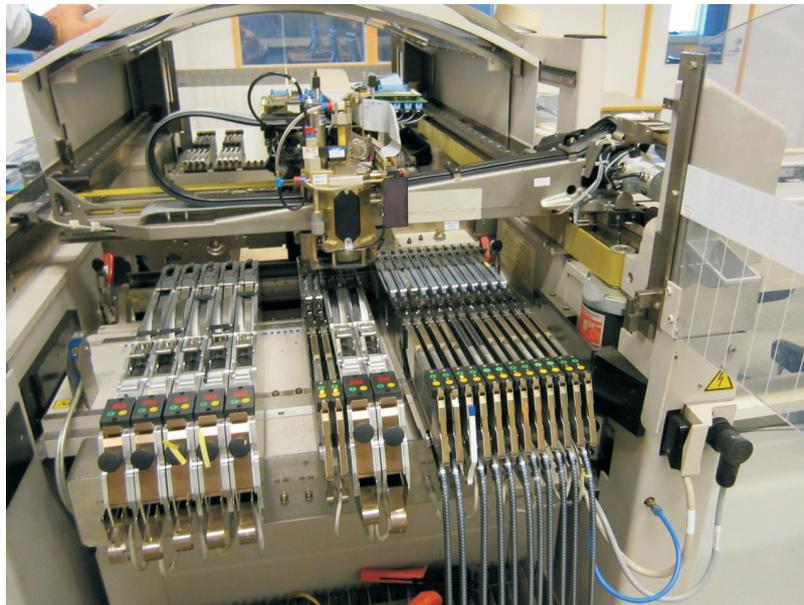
Component placement machine (Siemens Siplace 80 F4) equipped with both the pick-and-place- and the collect-and-place-heads. The collect-and-place-head is a revolver-type (see Figure 2.9) and has 12 spindles for nozzles.
